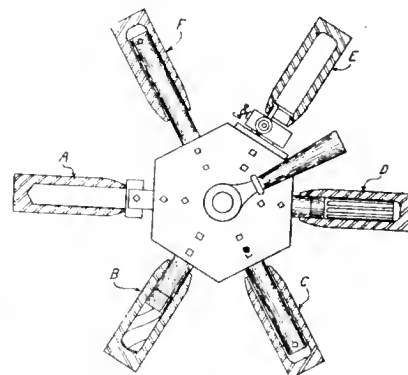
A. TURRET LAYOUT FOR FACING NOSE AND FINISHING INSIDE OF SHELL.
